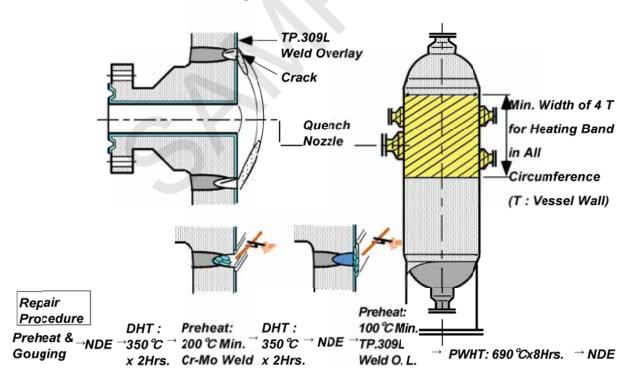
Repair welding of nozzle attachment weld
